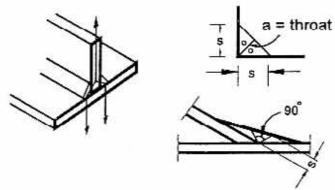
Dimensions of Size and Throat of Fillet Weld
